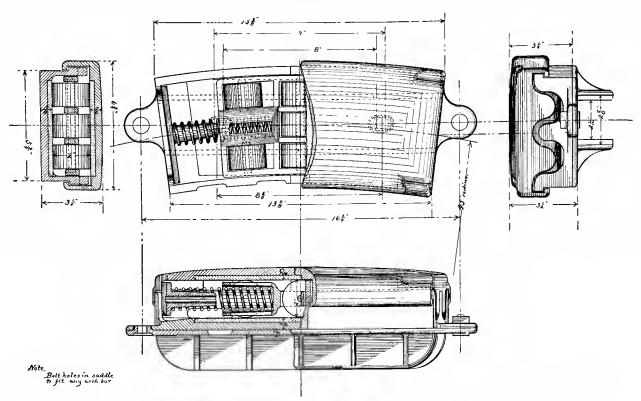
Perry Side Bearing for Passenger Train Cars. Joliet Railway Supply Company.
